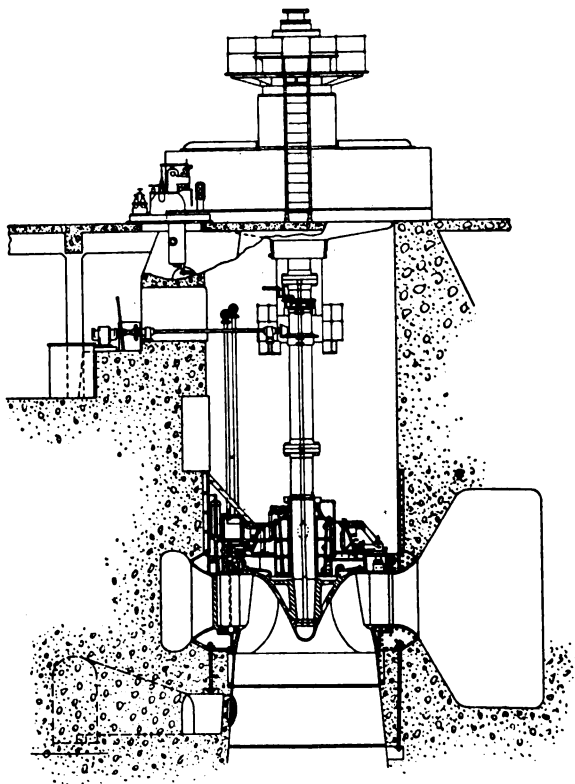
SHOWING OIL PUMP GEAR-DRIVEN FROM MAIN TURBINE SHAFT
